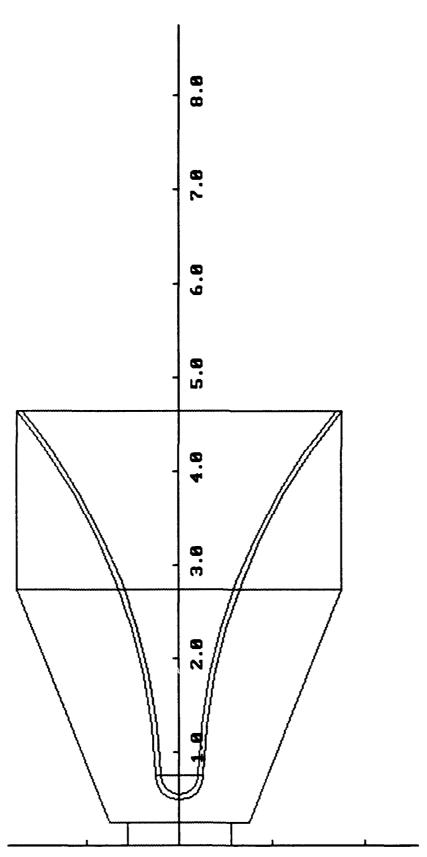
Explosive Liner Assembly for 90mm Warhead (weight = 810 g)
